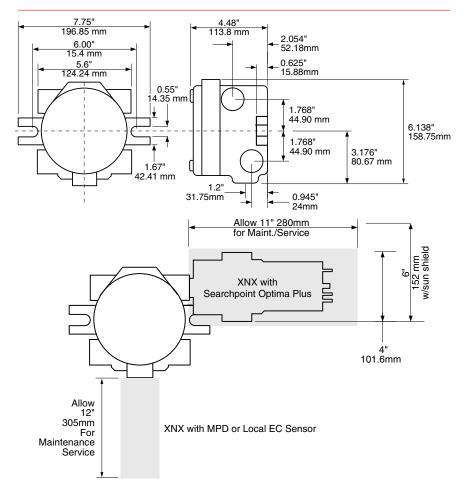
XNX Universal Transmitter Mounting Dimensions and Clearances
